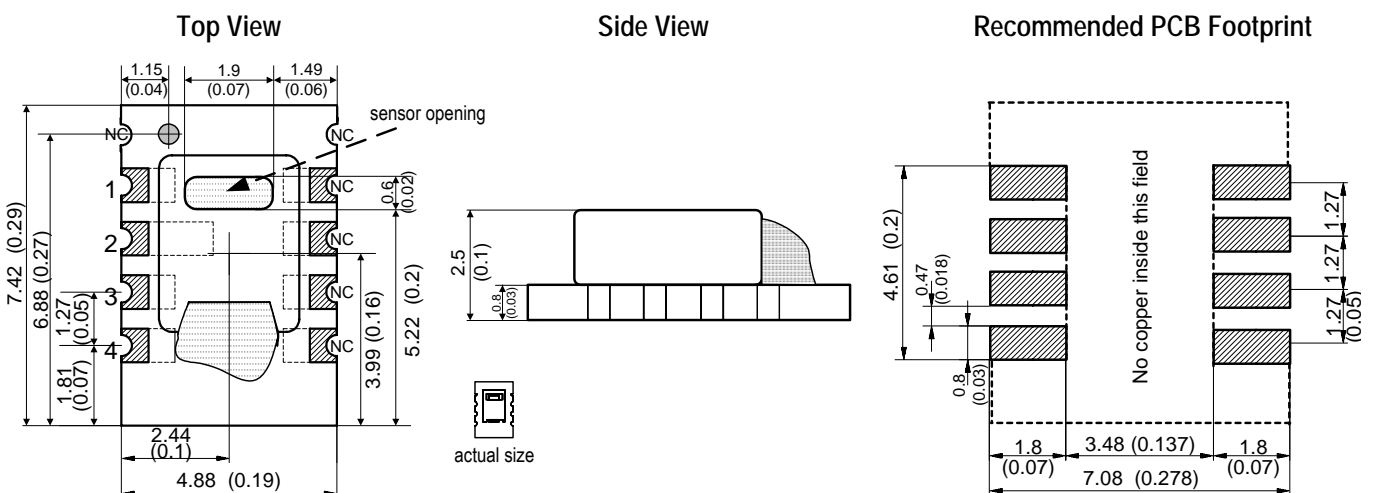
SHT1x drawing and footprint dimensions in mm (inch)
